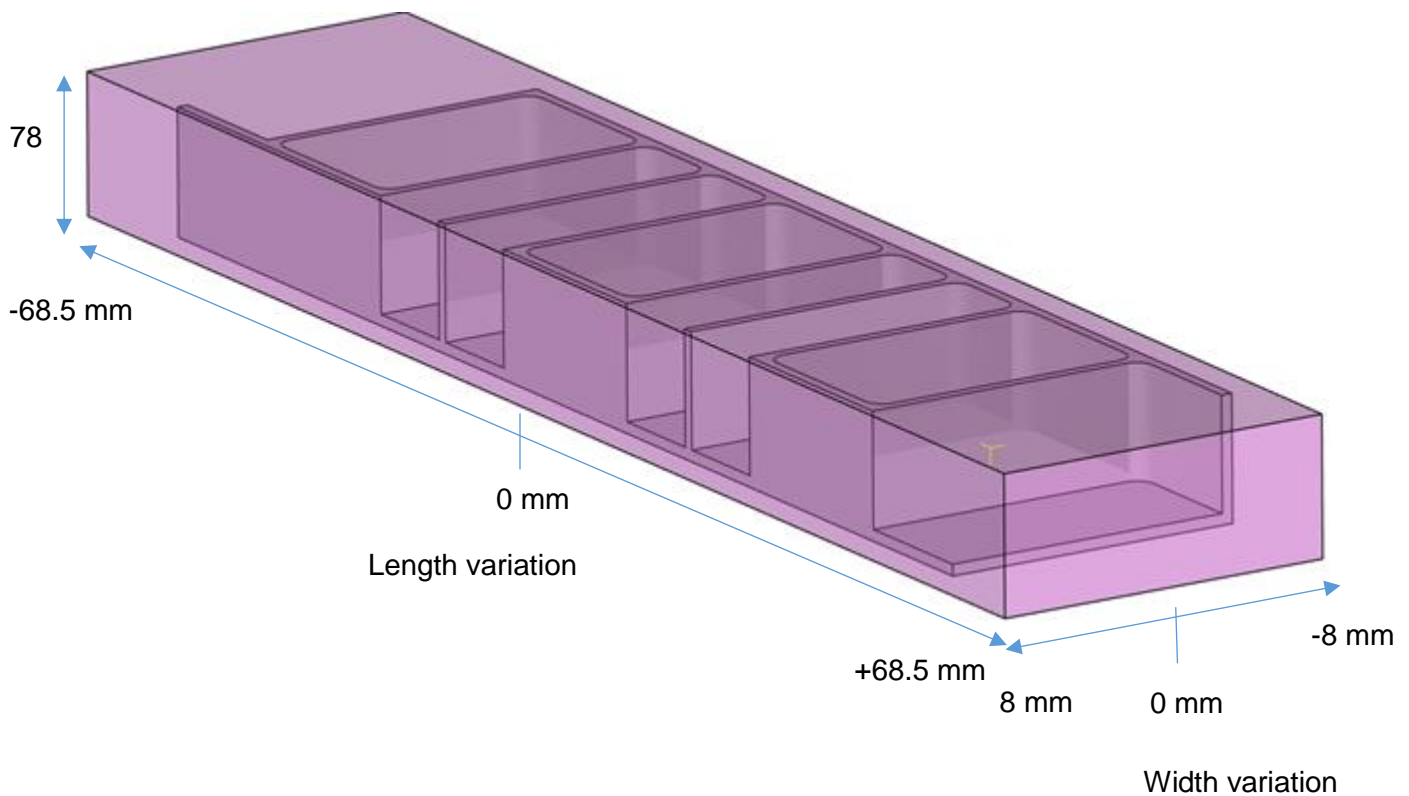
Positioning of the machined workpiece in the forged billet (dimensions in mm).
